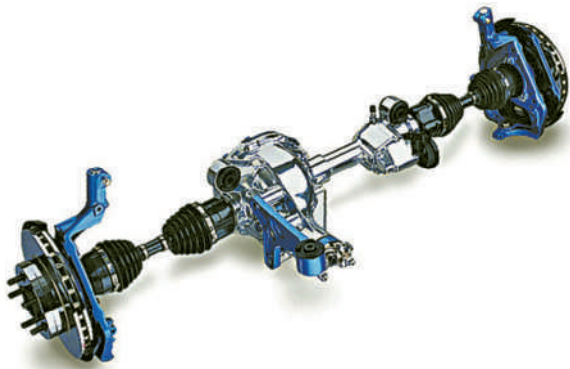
A CV joint-equipped rear axle assembly for a vehicle with independent rear suspension.
